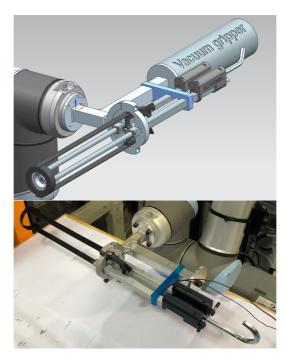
The entire CAD assembly and the final mechanical setup of the sealant tool.
